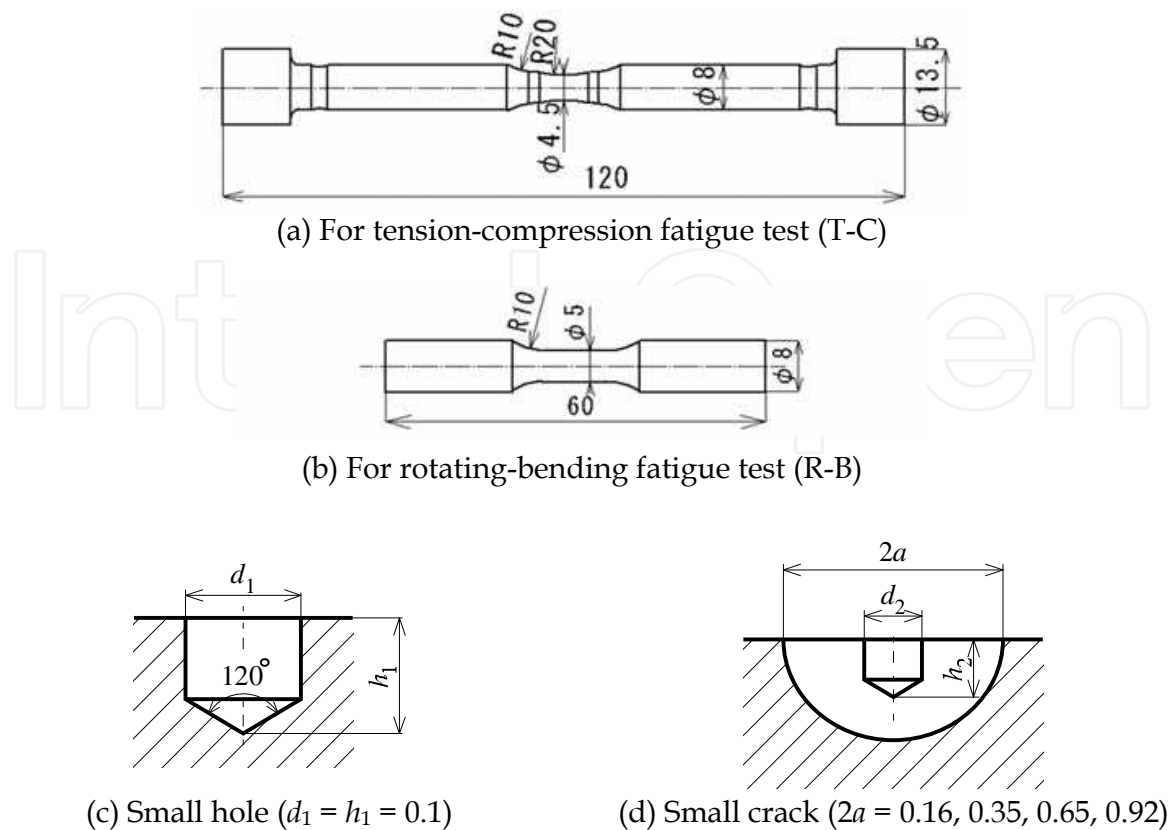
Shapes and dimensions of the specimens (dimensions in mm)
